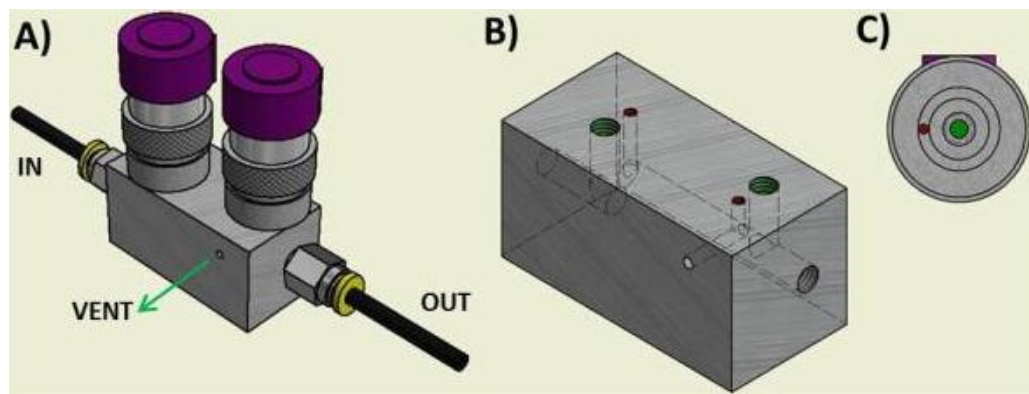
Clippard manifold design, showing 2 valves and the inlet / outlet paths (A). The manifold is machined (B) such that the central inlet and radial outlet of each valve (C) line up with corresponding holes in the metal block.
